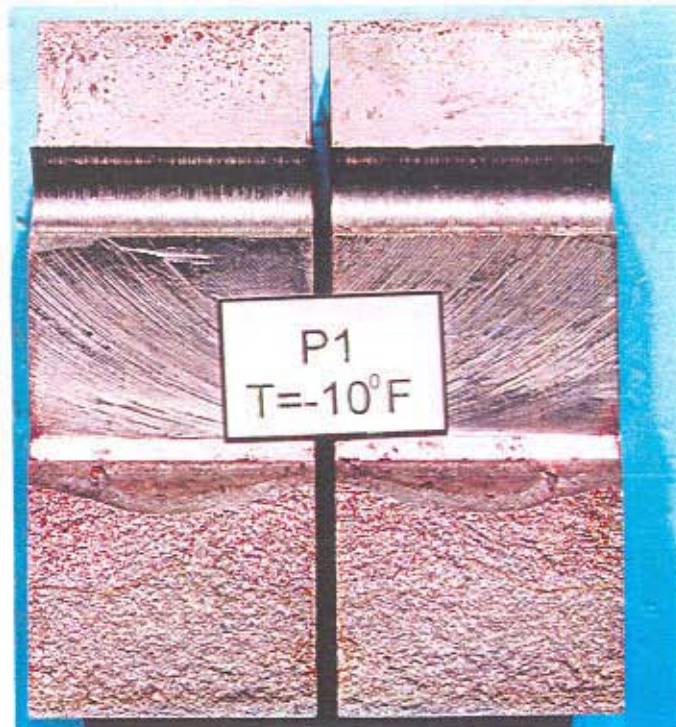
Fracture Surfaces of Test Specimen P1. (6/00/3-4)
